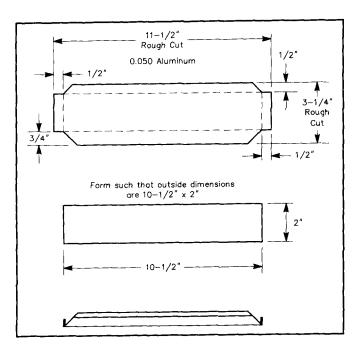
Bottom cover of cathode compartment, made from 0.050-in. aluminum sheet.
